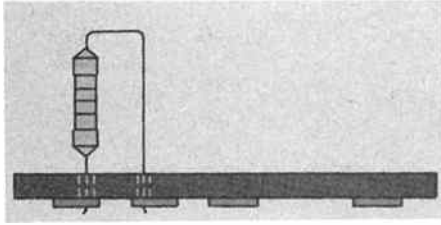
Mixed-print assembly. The first stage... insertion of leaded components.
